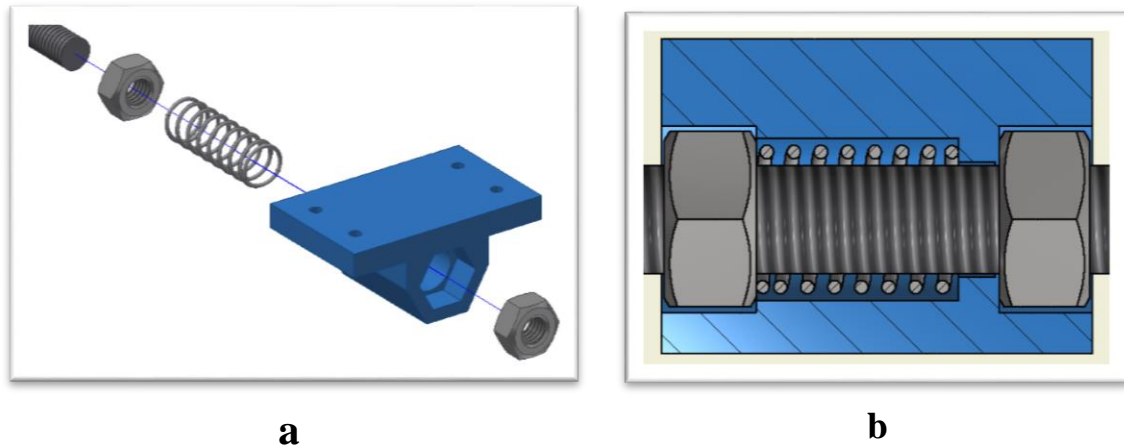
a) transmission assembly; b) section view of assembled mechanism.
